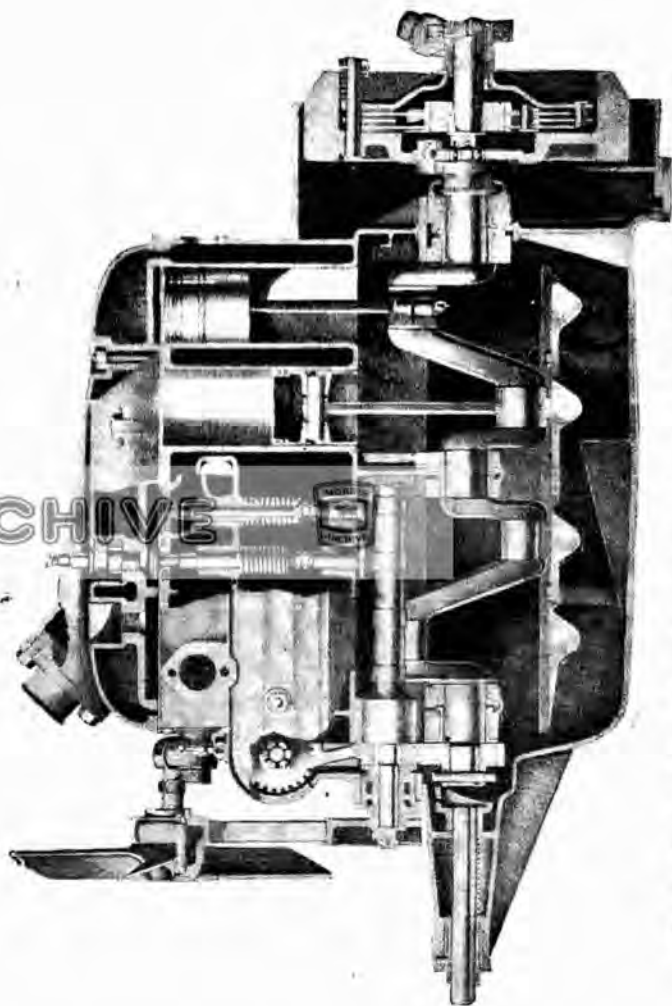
Sectional view of the Morris engine showing the three-bearing crankshaft and other component parts.
